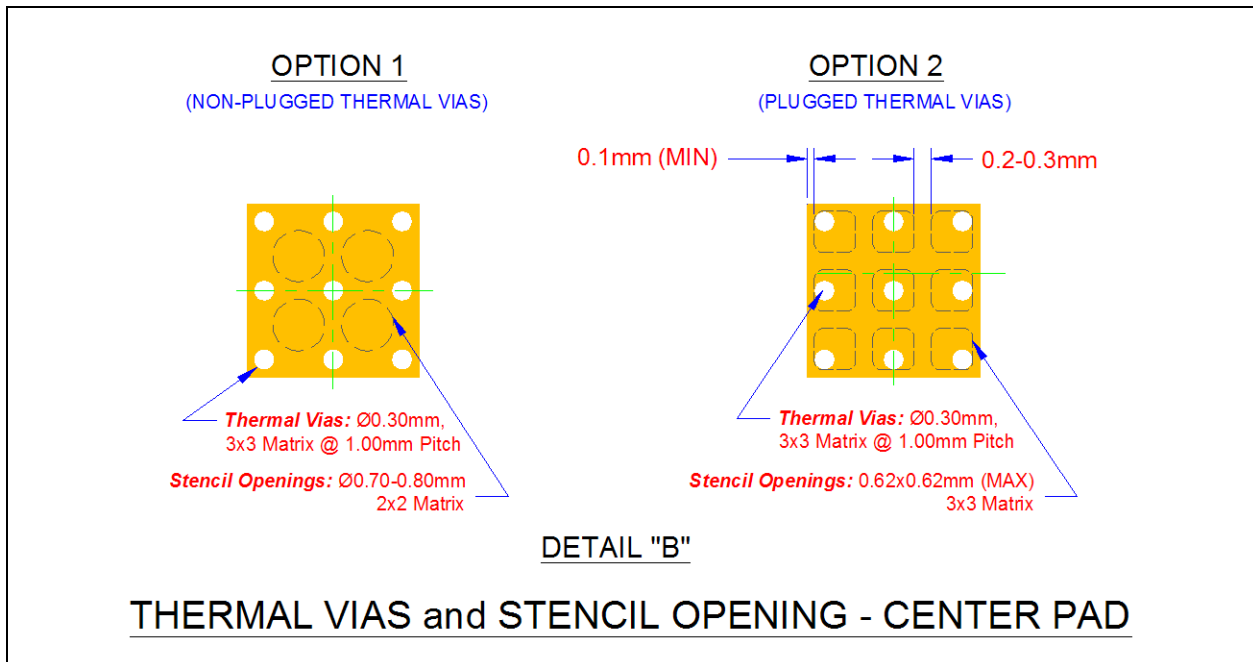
CAP1088 PCB Detail B - 24-Pin QFN 4mm x 4mm
